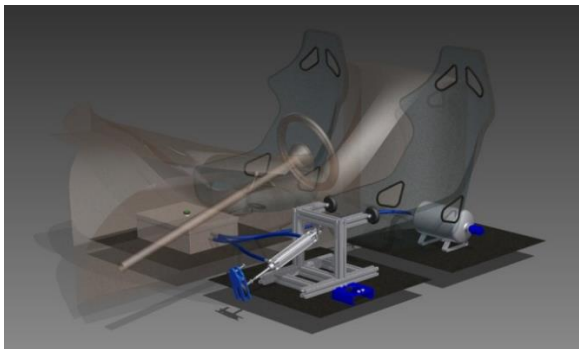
Virtual assembly of the braking mechanism - CESVI Colombia
